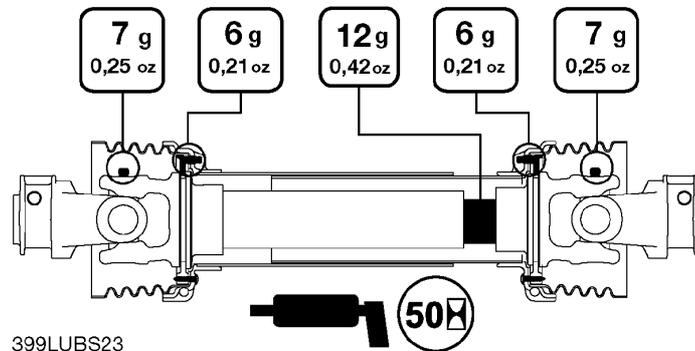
PTO shaft 7G2N081CE0070E9A and 7G2N091CE0070E9TA lubrication points. Mounting directions
